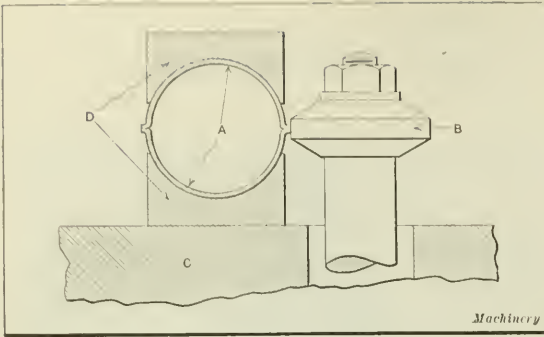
Diagram showing Method of welding Teapot Spouts on Machine shown in Fig. 2
